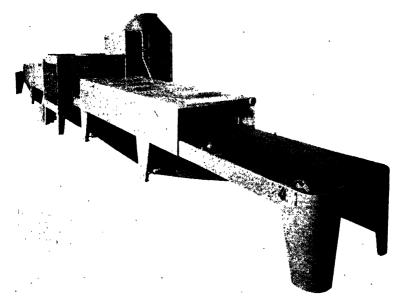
Alloy metal conveyors help transport miscellaneous parts through the cleaning operation.
